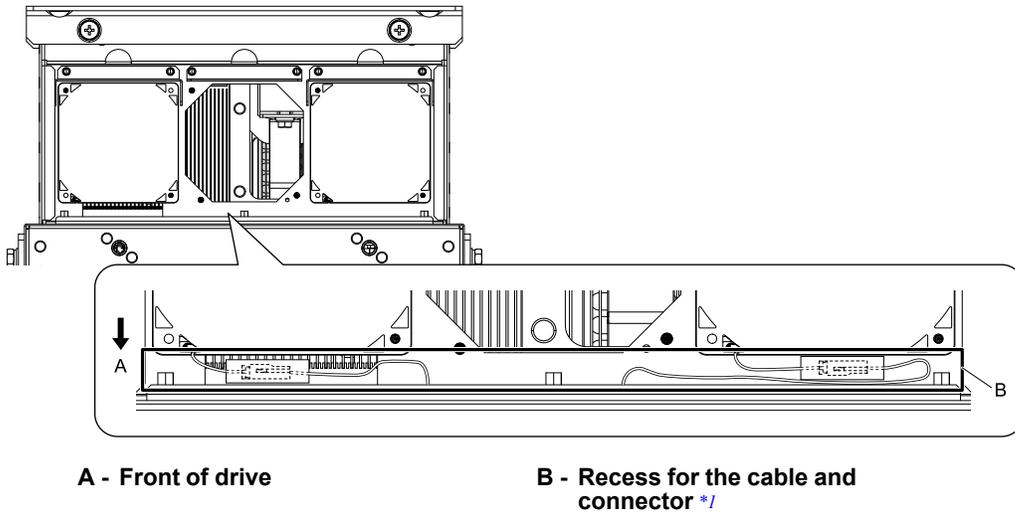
Put the Cables and Connectors in the Drive Recess
